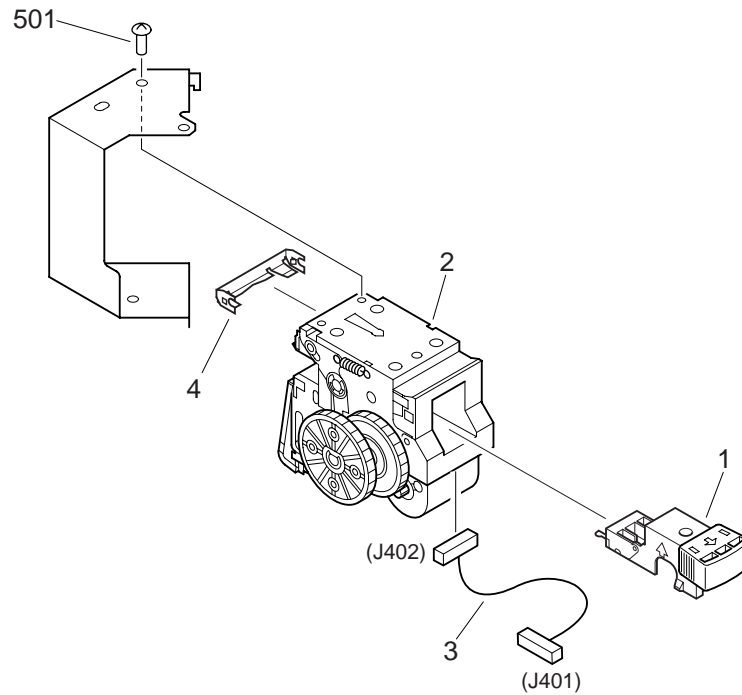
PAPER HEIGHT SENSOR ASSEMBLY
